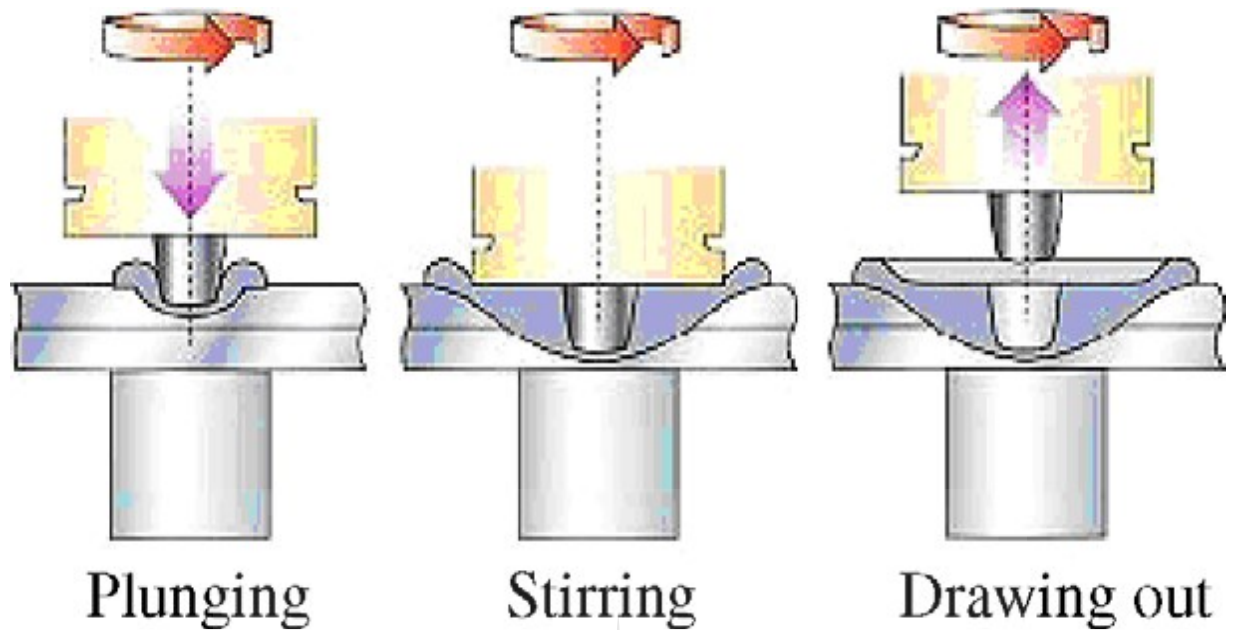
Schematic illustration of friction stir spot welding process [26]
